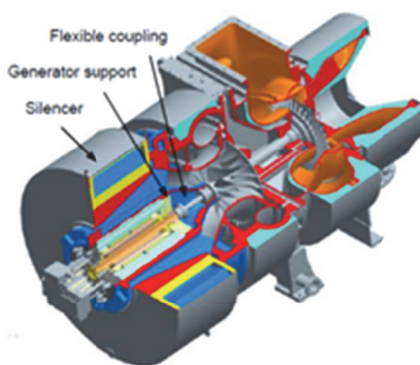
MET83MAG Hybrid Turbocharger Cross-sectional View
